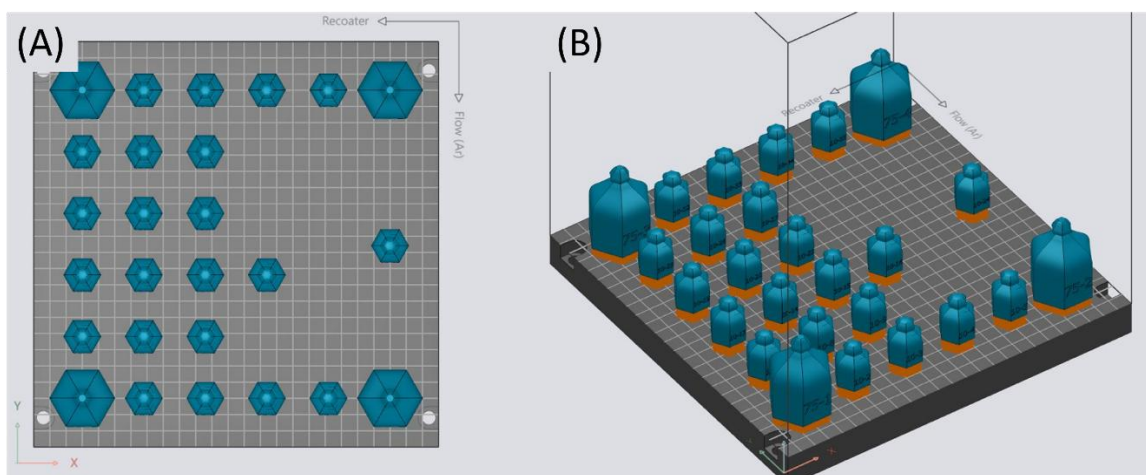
Powder capture build layout (A) top view and (B) oblique view showing locations of the powder capsules in the build.
